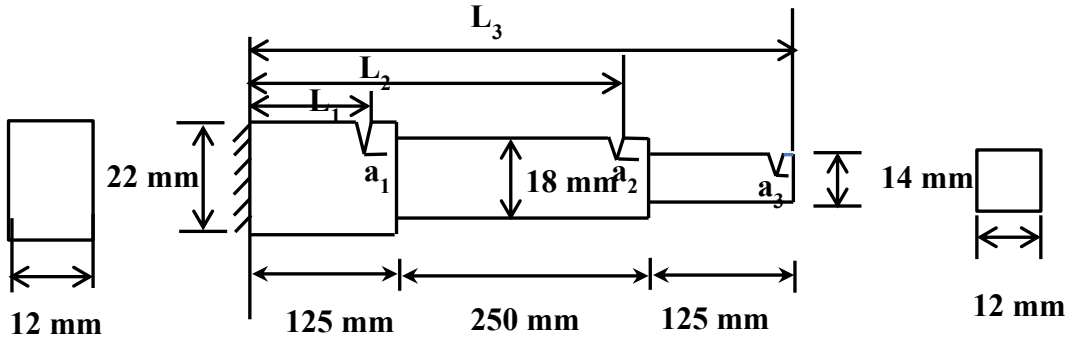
Sketch of multiple cracked two stepped cantilever beam of rectangular cross-section
